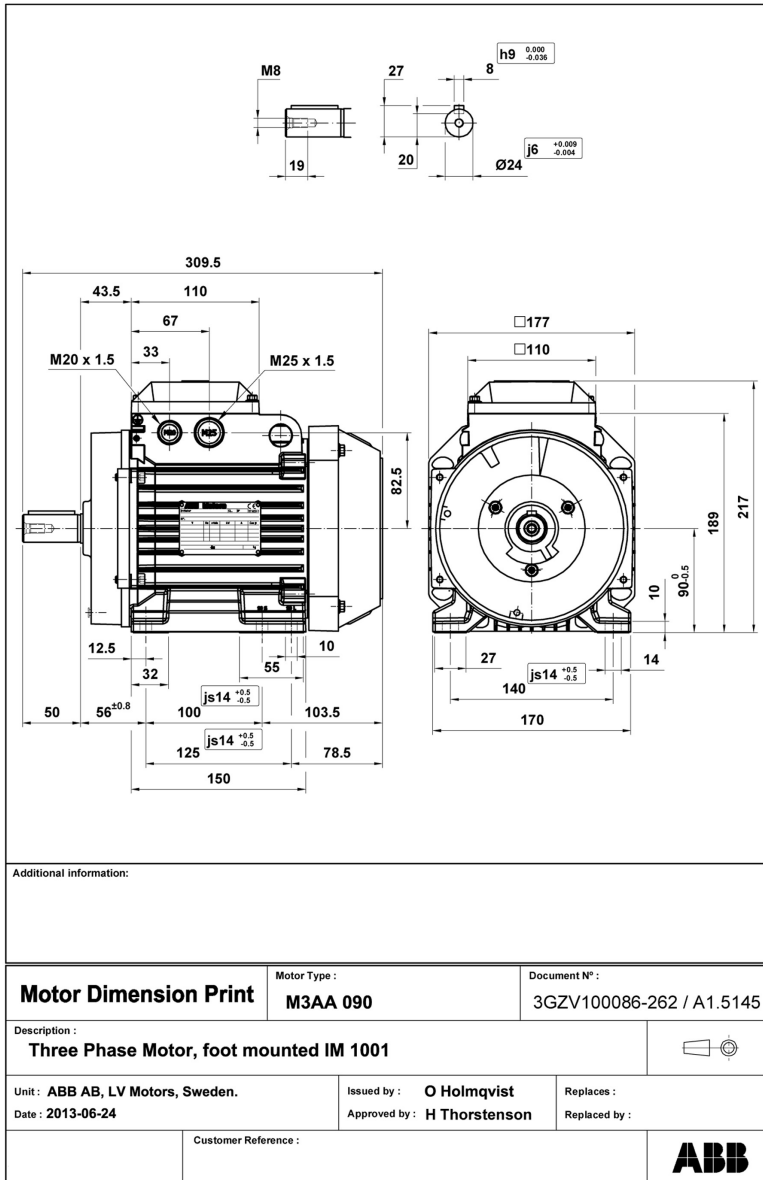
ABB top drive motor product specifications (3GAA091520-ASJ) [65].
